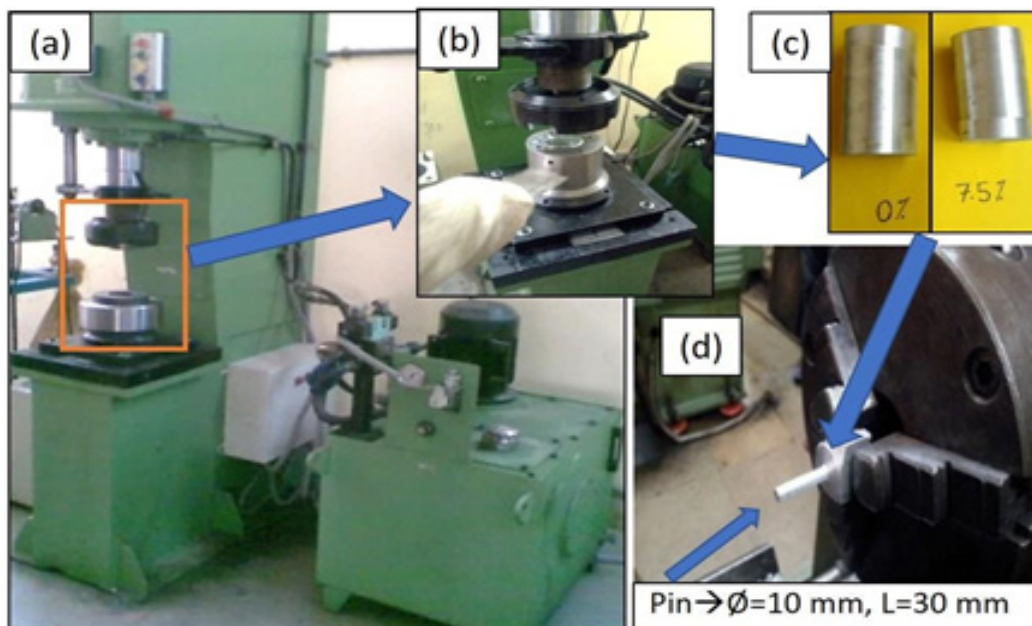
(a) Squeeze Casting setup (b) cast billet inside the set-up (c) finished cast alloy LM25 and composite (d) pin-on-disc specimen preparation and its dimensions.
